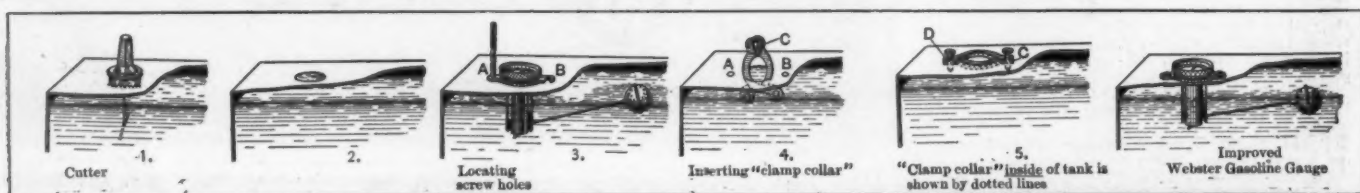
Showing the stages of fitting a Webster gasoline gauge to the tank and the ball system operating a pinion on the end of the shaft.
